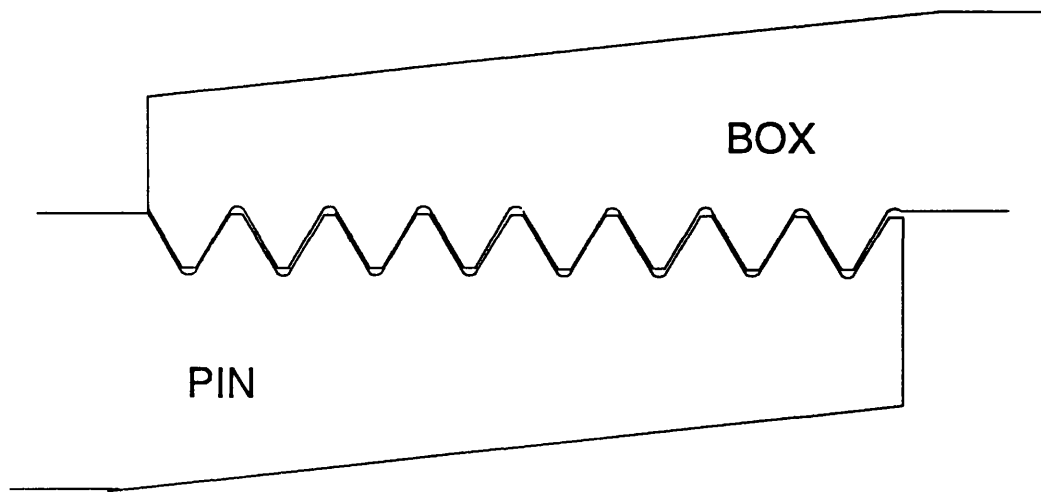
Example of Tapered Threaded Connection (Parallel Thread)
